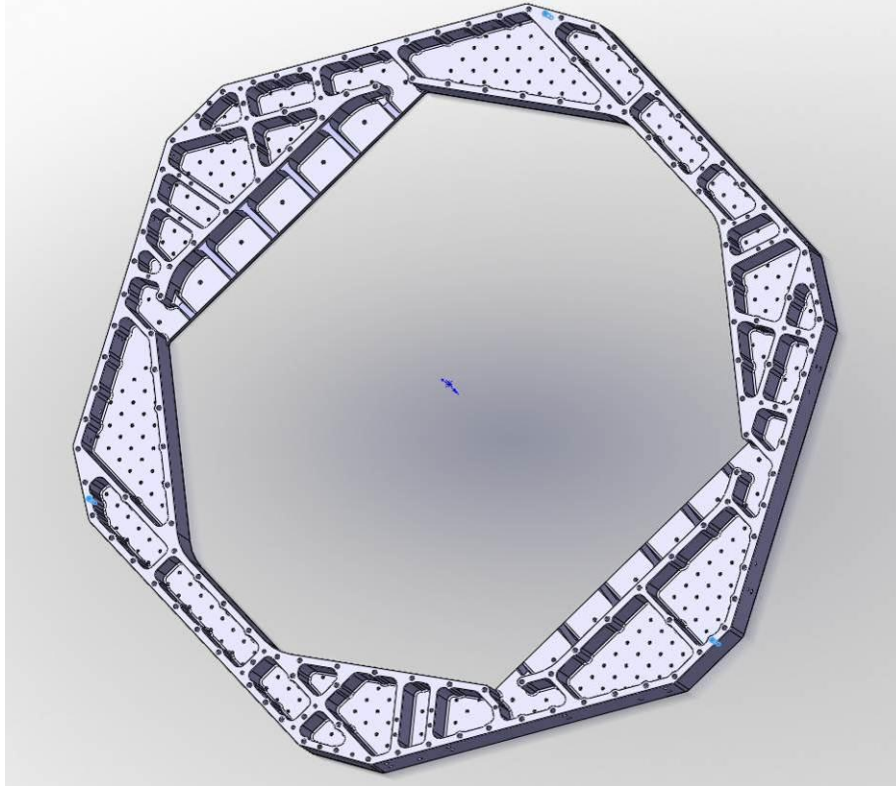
D0900894 Bottom Part of Stage 0 with the bottom lifting holes highlighted in blue
